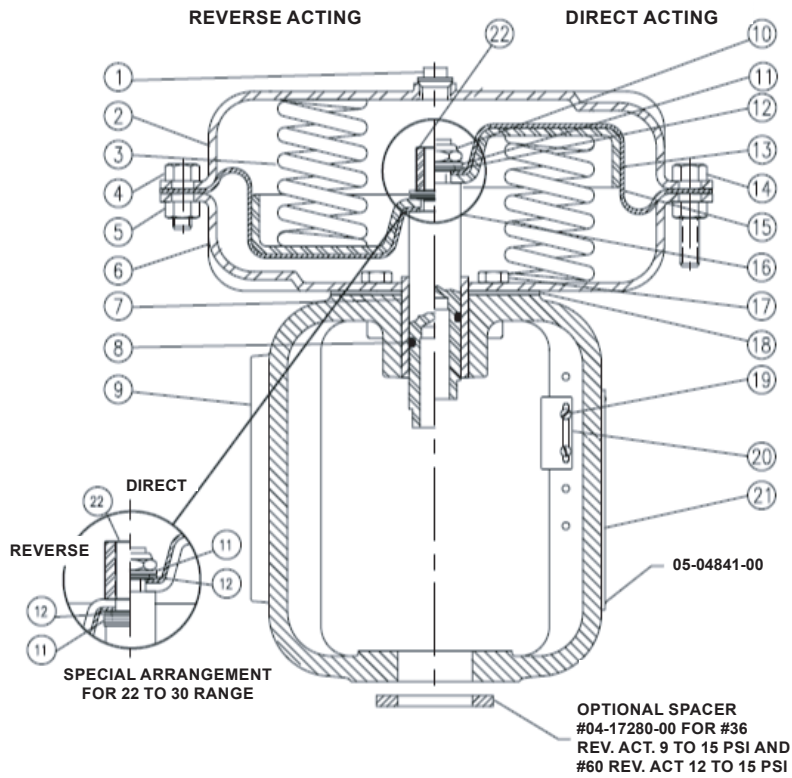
Types K1 and K4 Actuator Assembly Drawing
